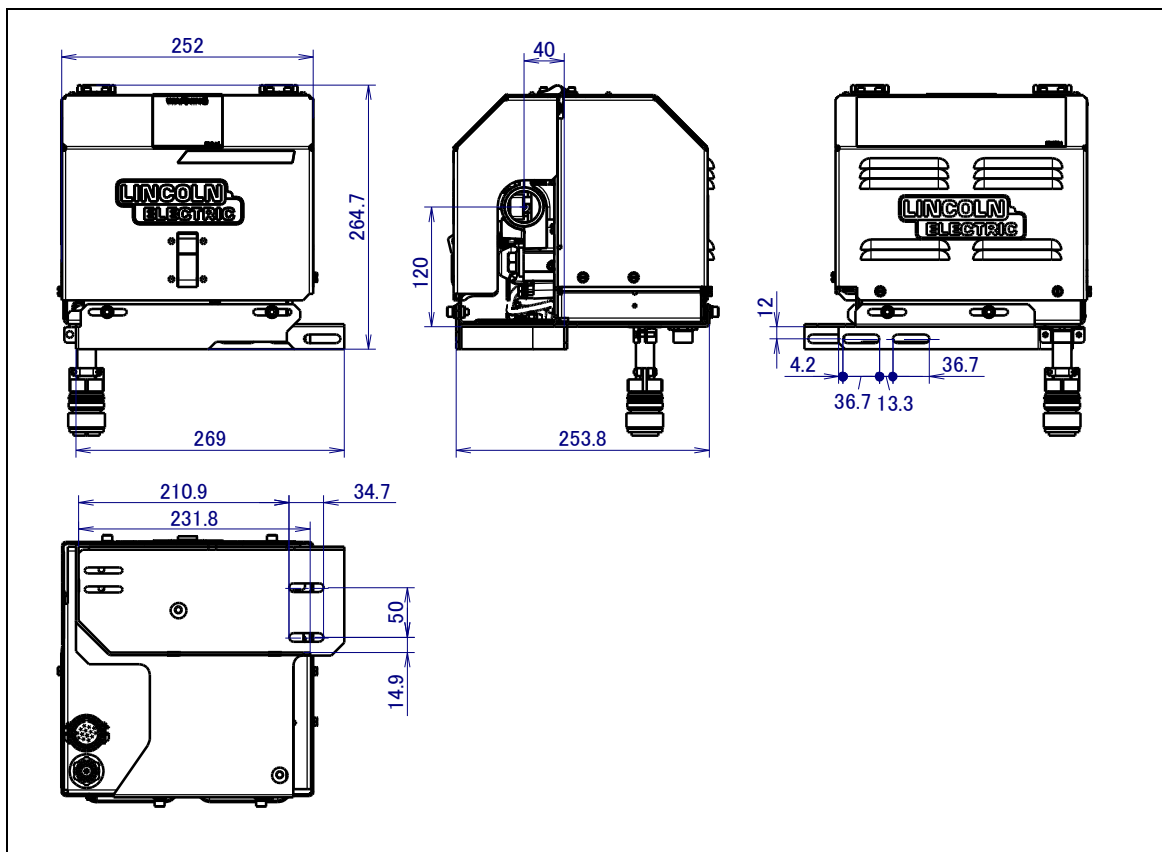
(d) Wire feeder external dimensions (A05B-1296-H202)
